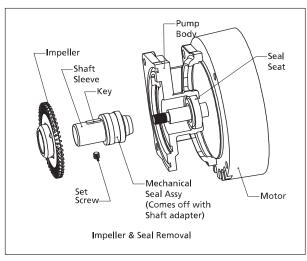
Impeller, Sleeve and Seal Assembly Removal
